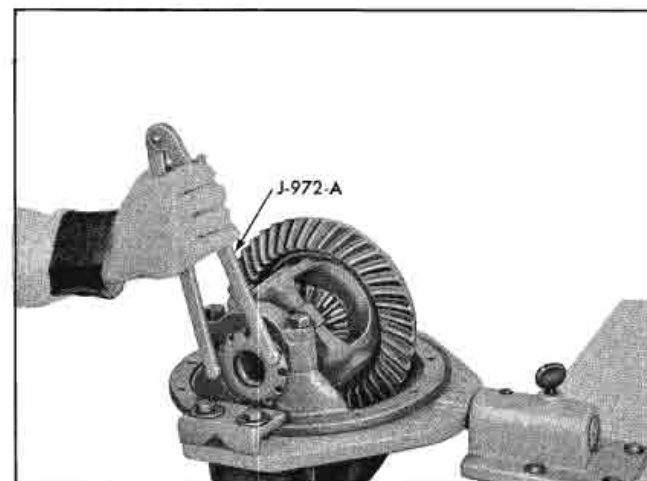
Backing Right Adjusting Nut with J-972-A
